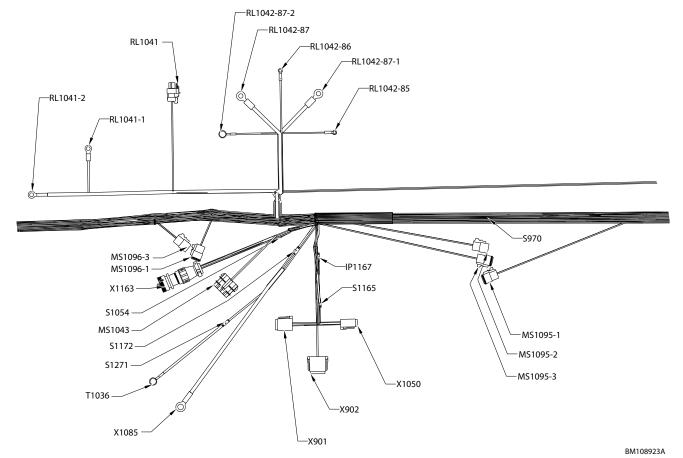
Deutz D2.9L4 (Stage V) Engine Harness - Sheet 3 of 4
